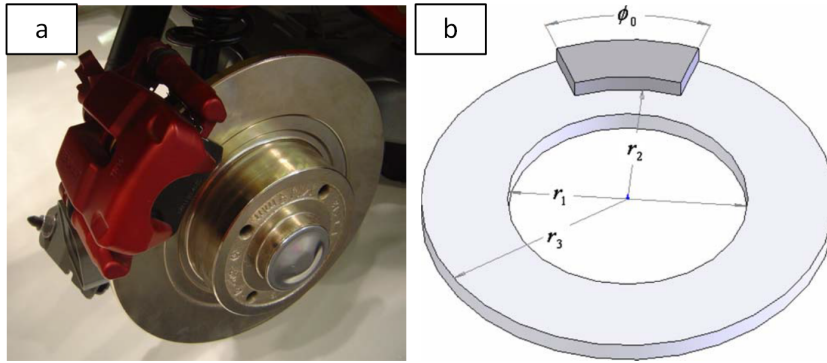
(a) Assembly and (b) schematic of the disk brake [61].
